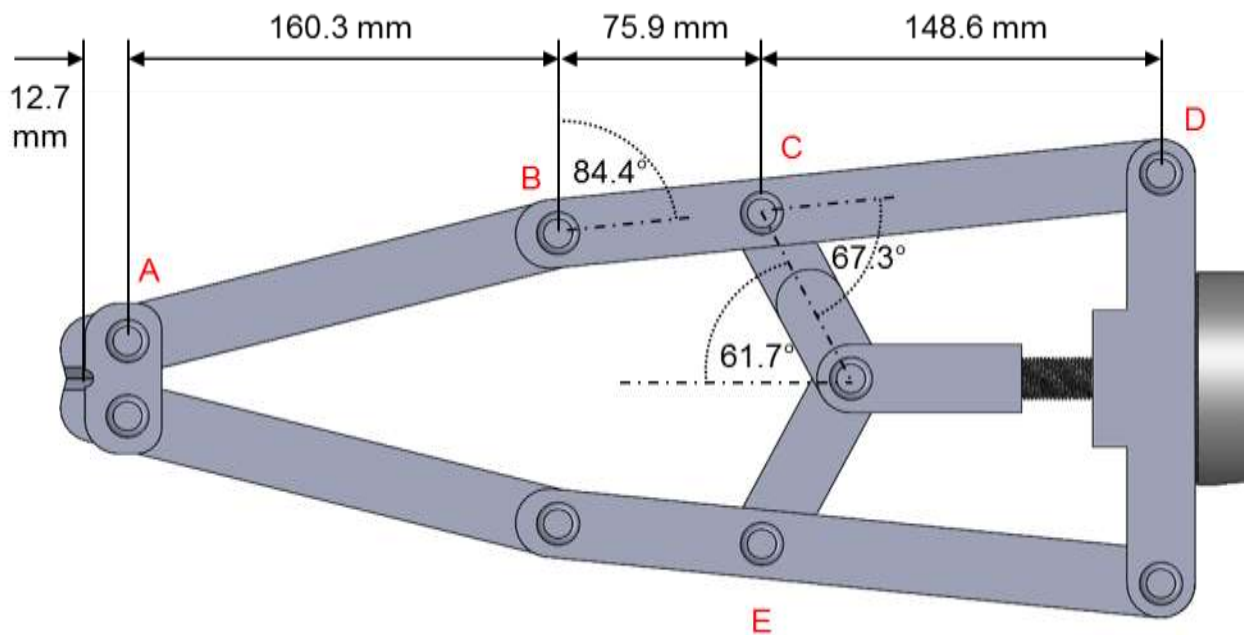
Drawing showing the dimensions necessary to calculate the mechanical advantage of the bolt cutter in its closed position
